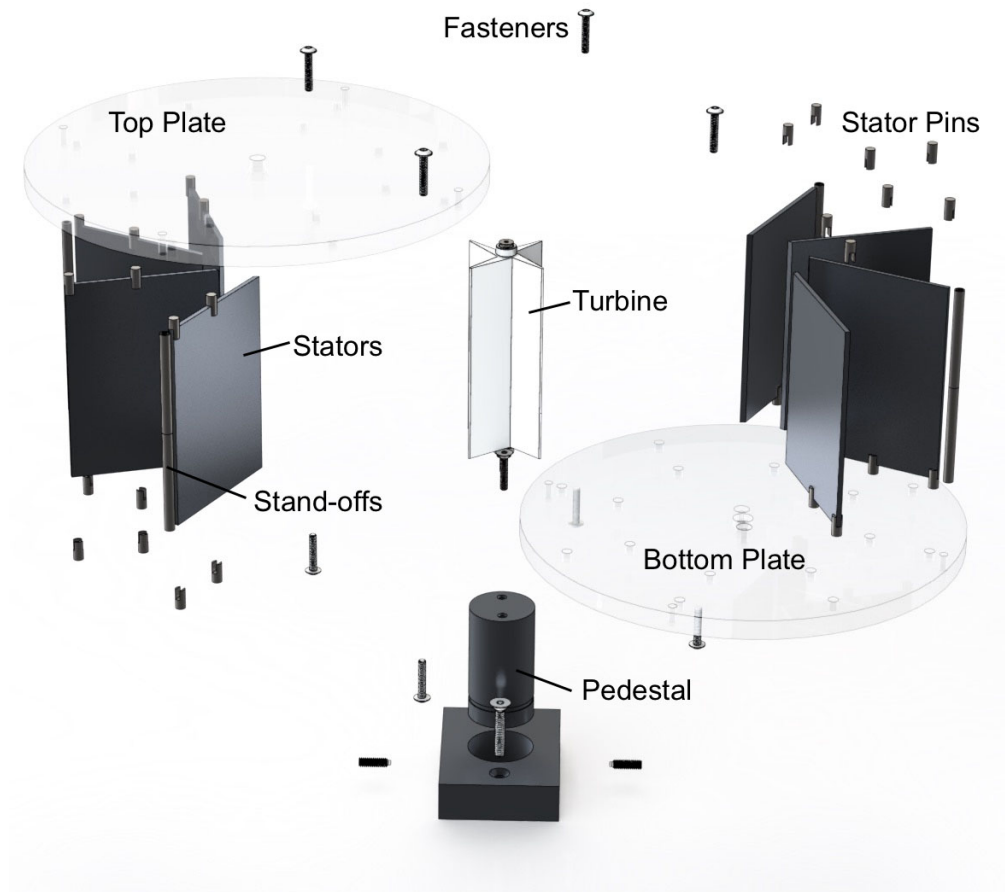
SolidWorks rendering of the 5 inch, revision 1 replica with exploded parts view
